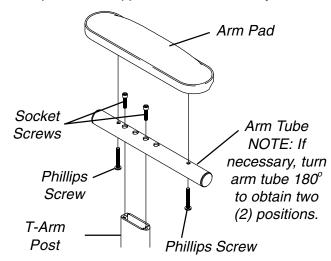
ADJUSTING THE T-ARM DEPTH
